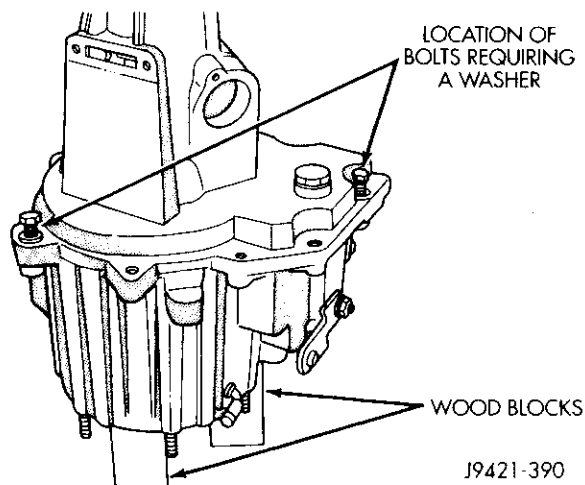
Location Of Rear Extension Bolts Requiring Washers
